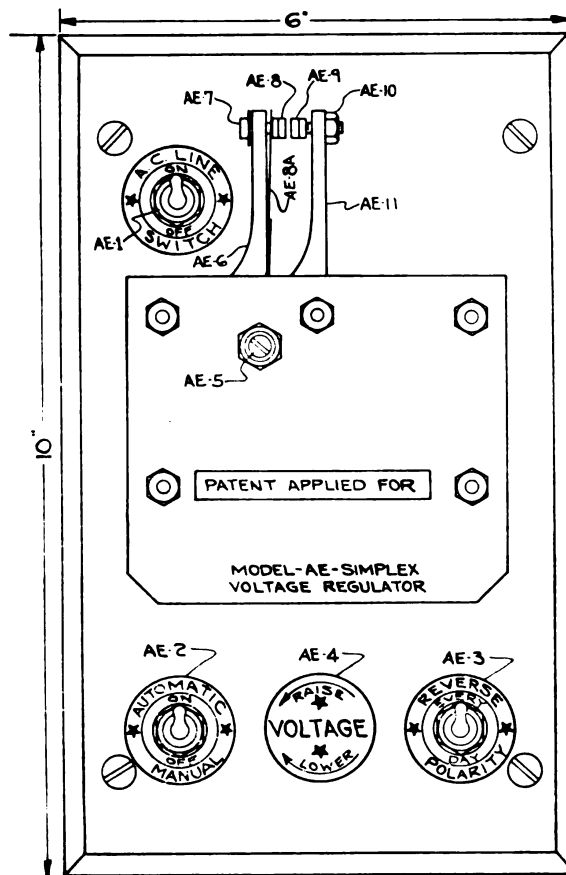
VOLTAGE REGULATOR, FRONT VIEW WITH COVER REMOVED
